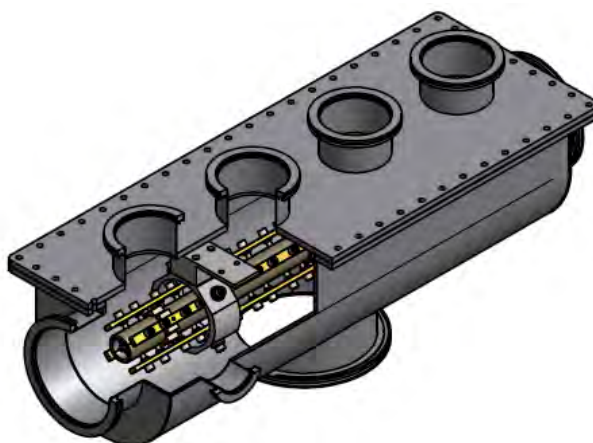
Technical drawing of the RFQ device placed in the vacuum chamber.
